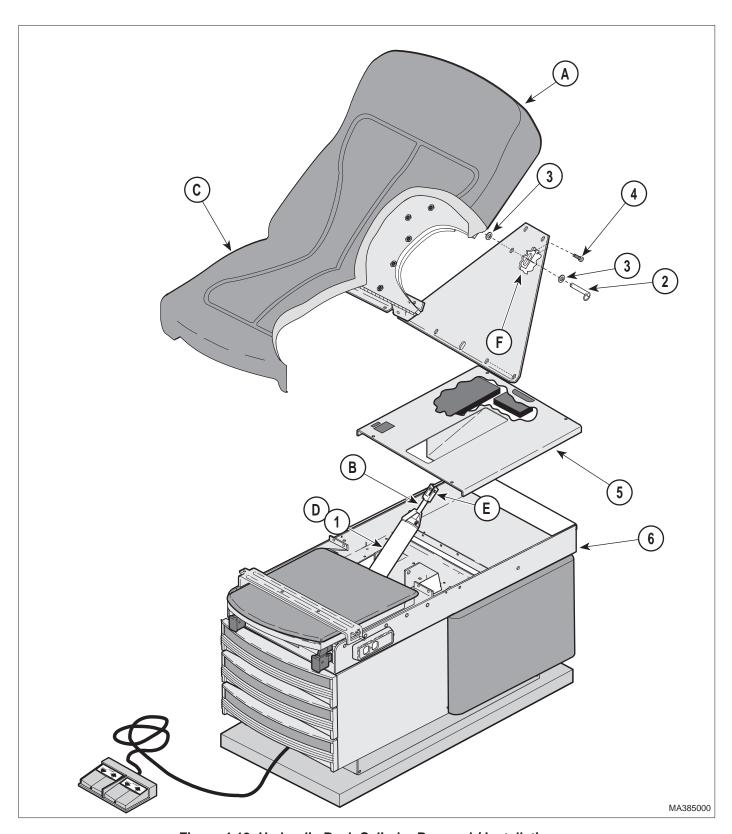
Hydraulic Back Cylinder Removal / Installation
